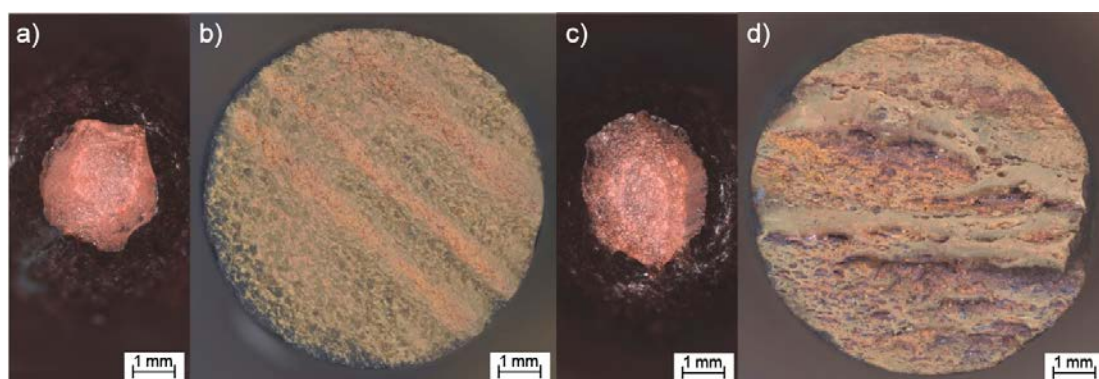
Fracture surfaces of cross-weld tensile test specimens from segment 1 and 2 with about 1 and 6–11 μm initial oxide layer thicknesses after hot tensile testing at a) segment 1, 75 °C, b) segment 1, 175 °C, c) segment 2, 75°C and d) segment 2, 175 °C.
